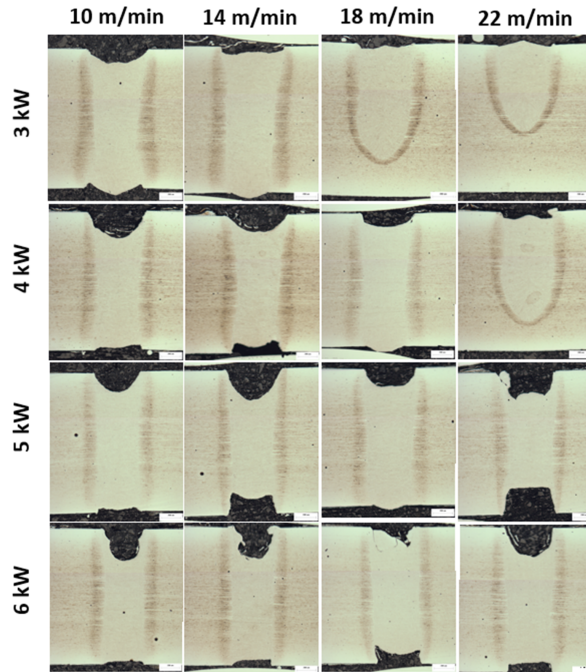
Fiber laser weld parameter selection matrix
